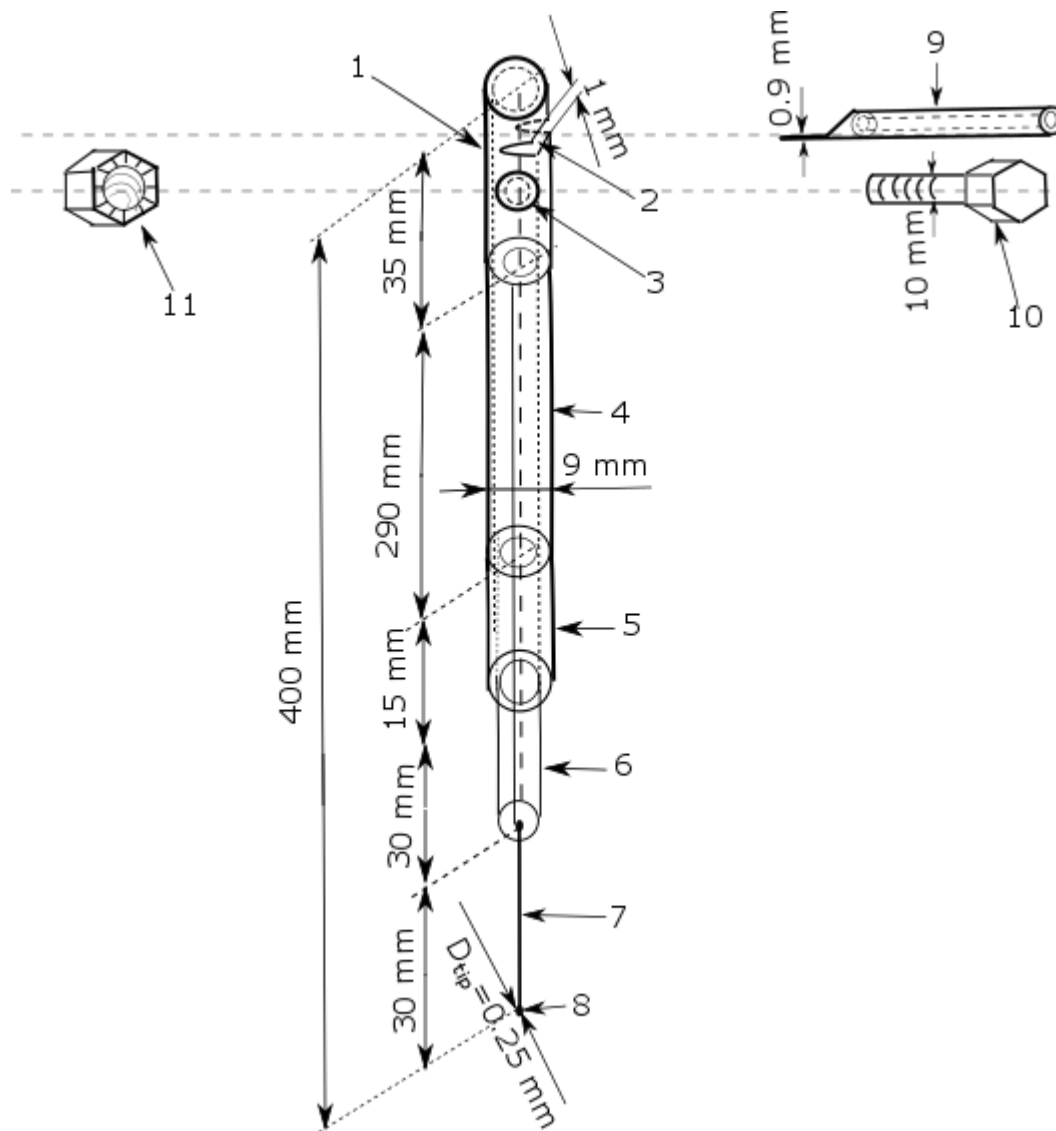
Detail drawings of the probe and their dimensions (1: probe head, 2: pin groove, 3: screw hole, 4: Rigid plastic tube, 5: PVC, 6: wire support (insulated part), 7: copper wire, 8: conductive probe tip, 9: Electrical pin, 10: bolt and 11: nut. See Figure 3.8
